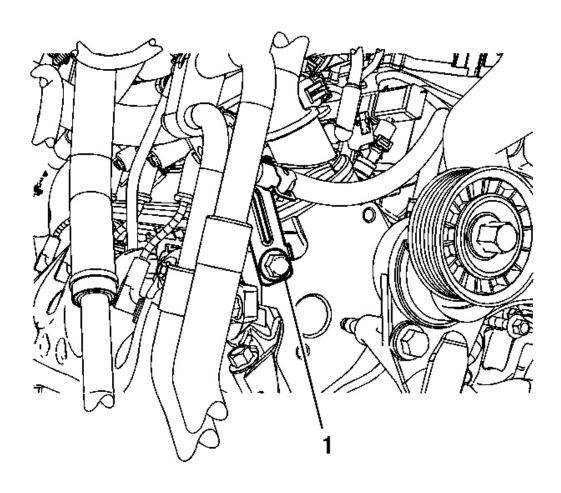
Heater Hose Bracket Bolt Courtesy of GENERAL MOTORS CORP.
